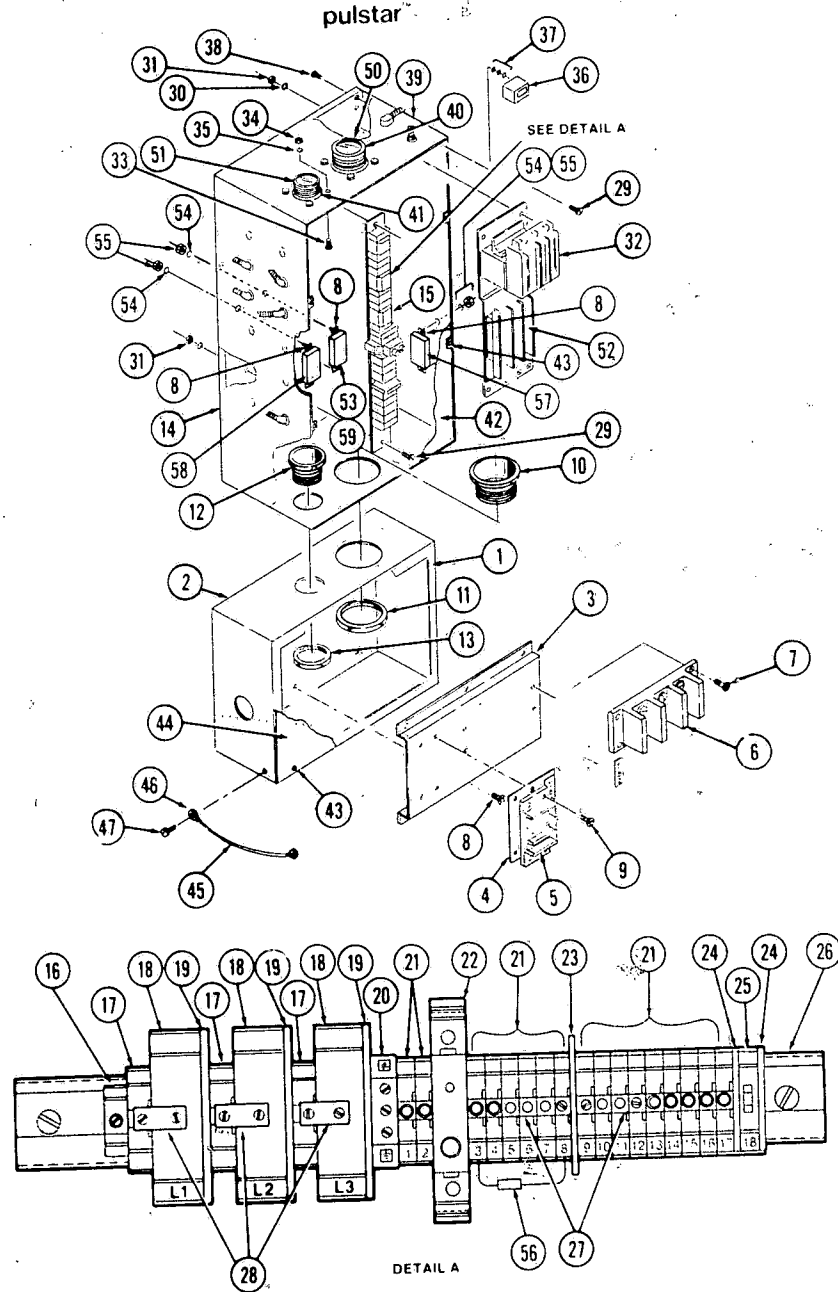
JUNCTION BOX ASSEMBLY — Steam Units.
